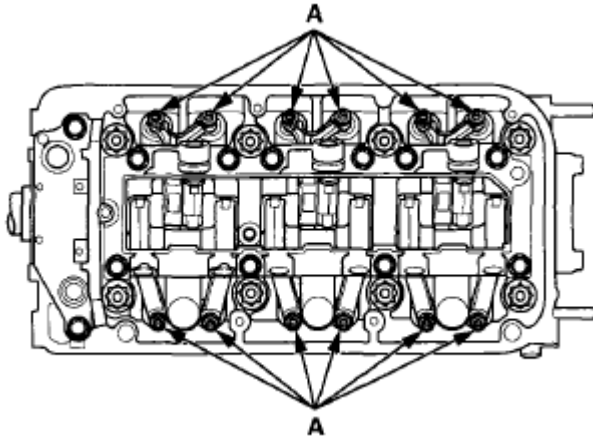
Identifying Locknuts And Adjusting Screws (Front)
